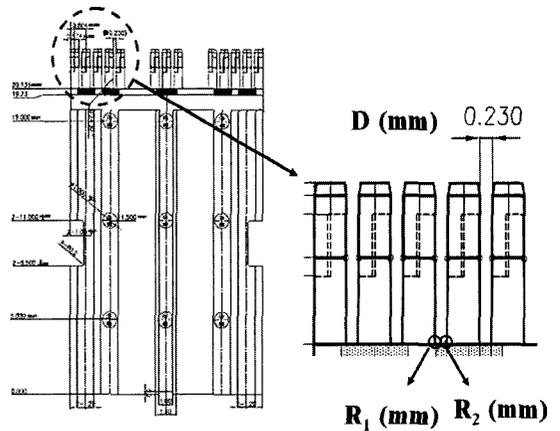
The drawing of the core pin(Ø=0.10mm)
